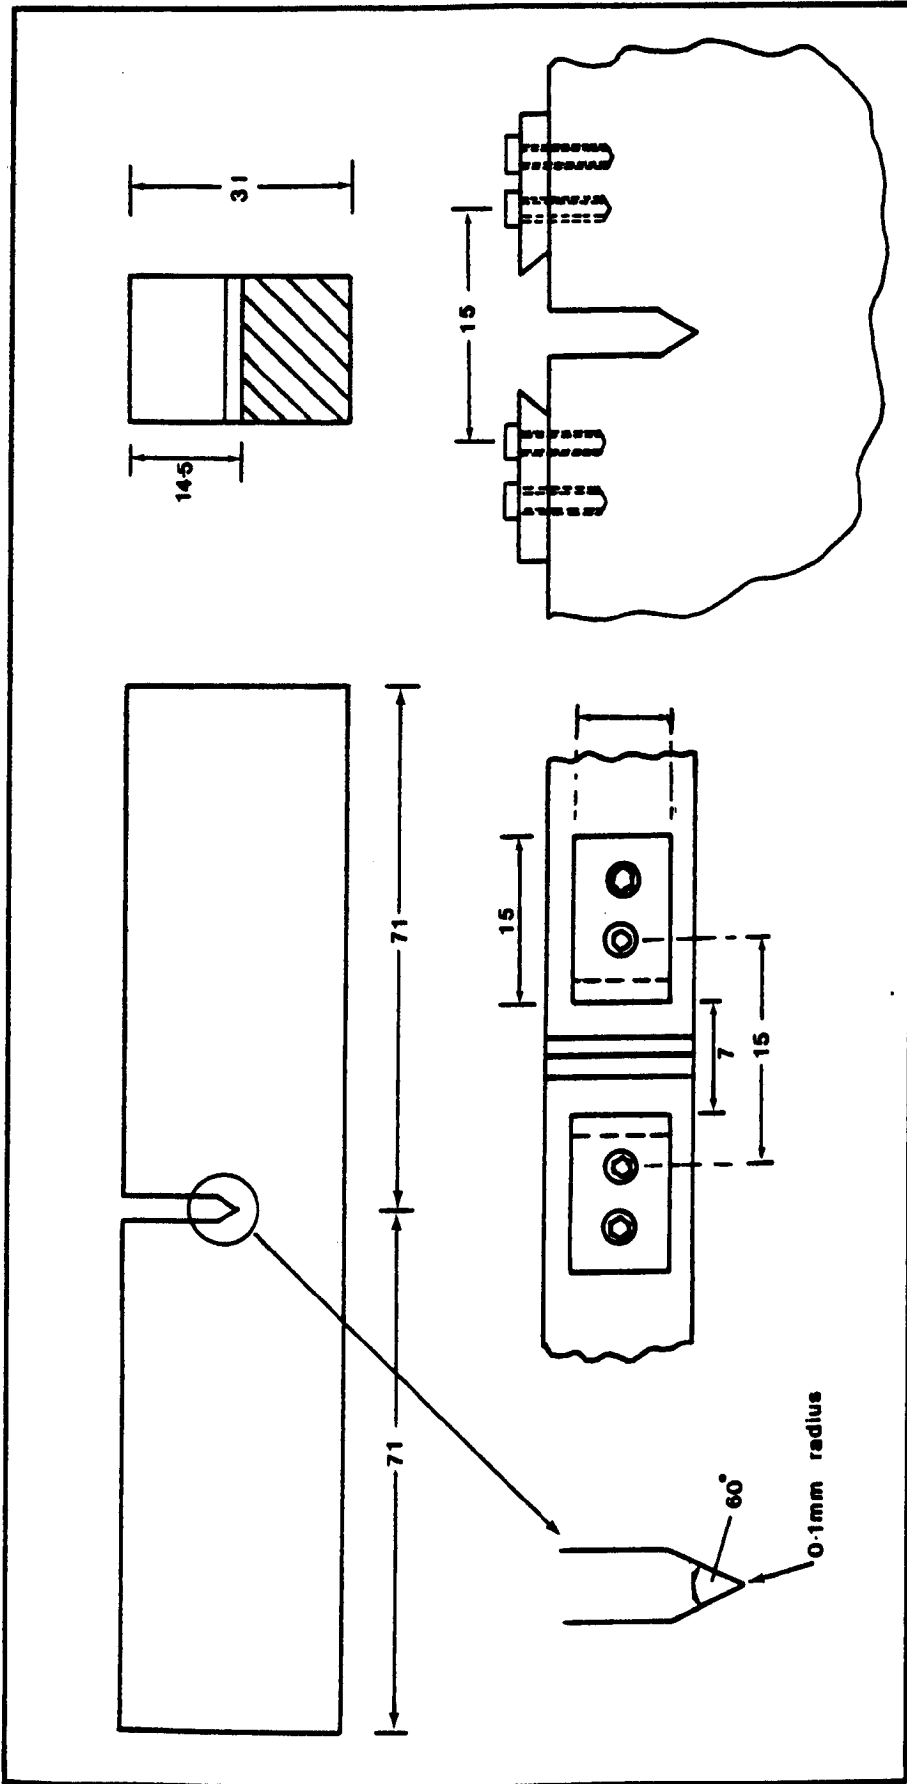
Schematic illustration of three-point-bend specimen and knife edges for location of clip gauge. Dimensions are in mm.
